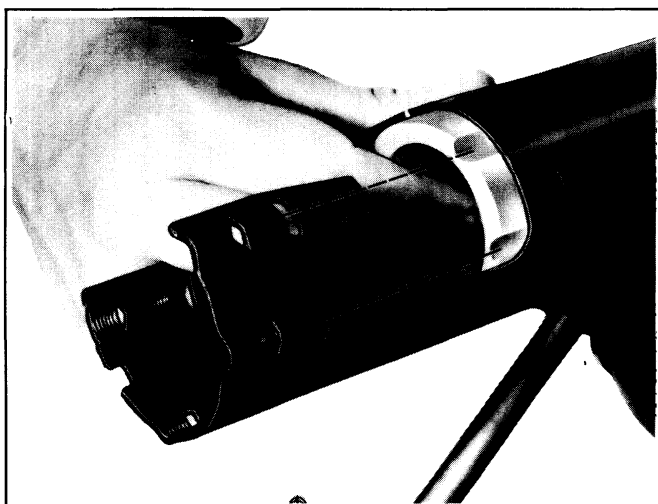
B-87--Installing Gearshift Housing Lower Bearing
